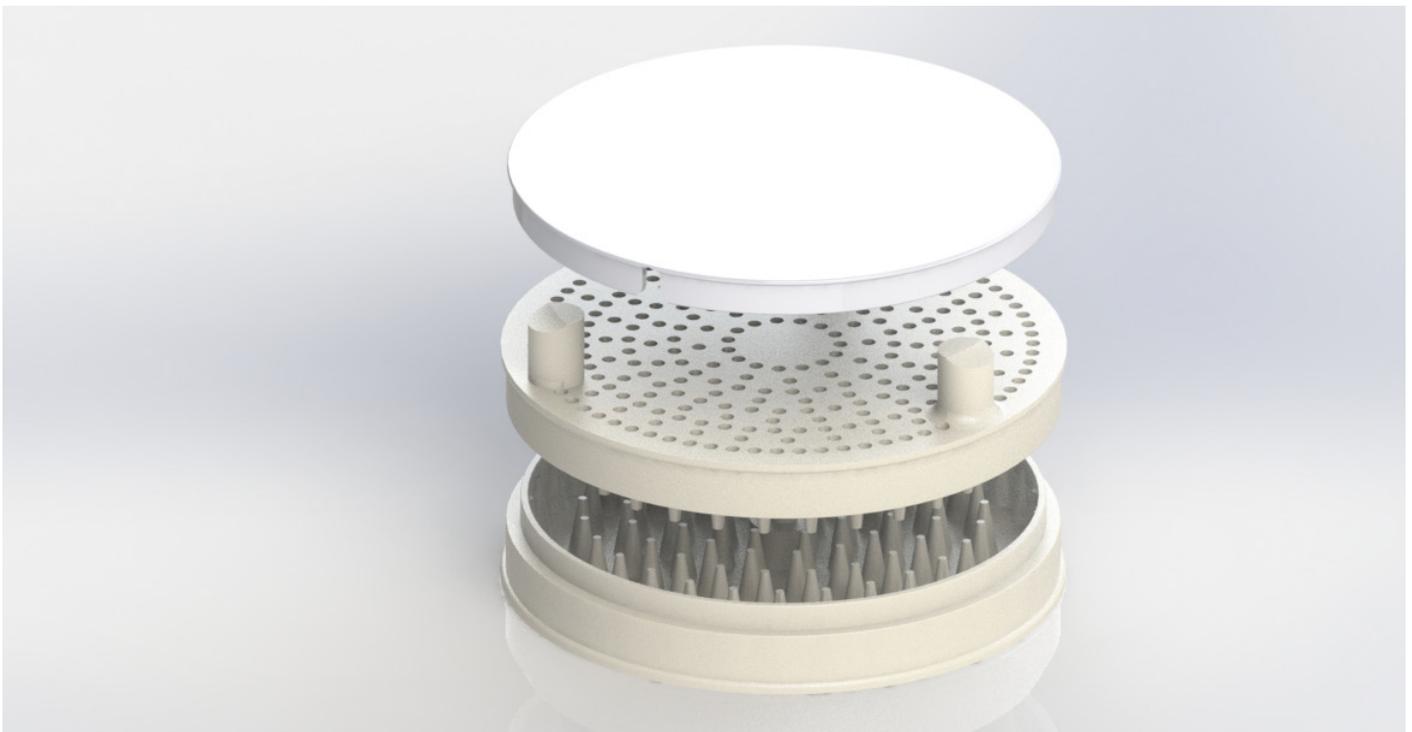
Grinder comprising of three parts. Starting at the bottom are the two grinding and drying parts, followed with the cap on top
